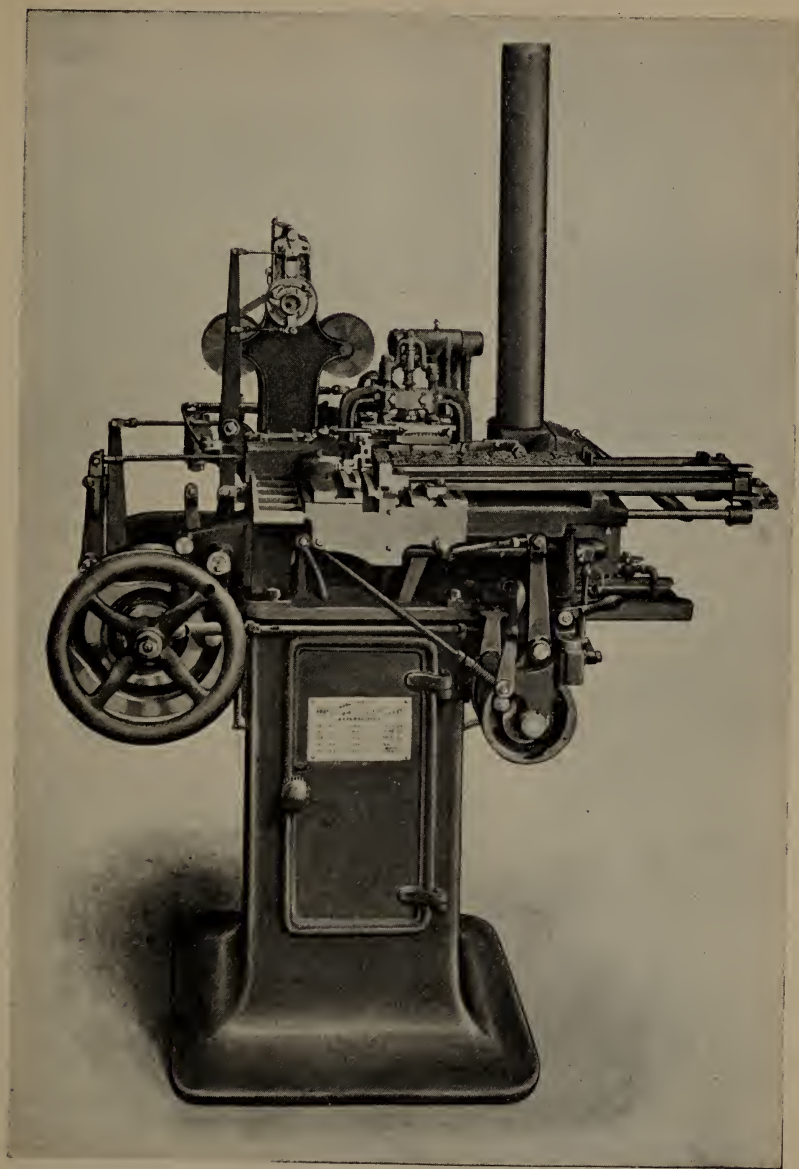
PLATE I.—FRONT VIEW MONOTYPE CASTING MACHINE.
